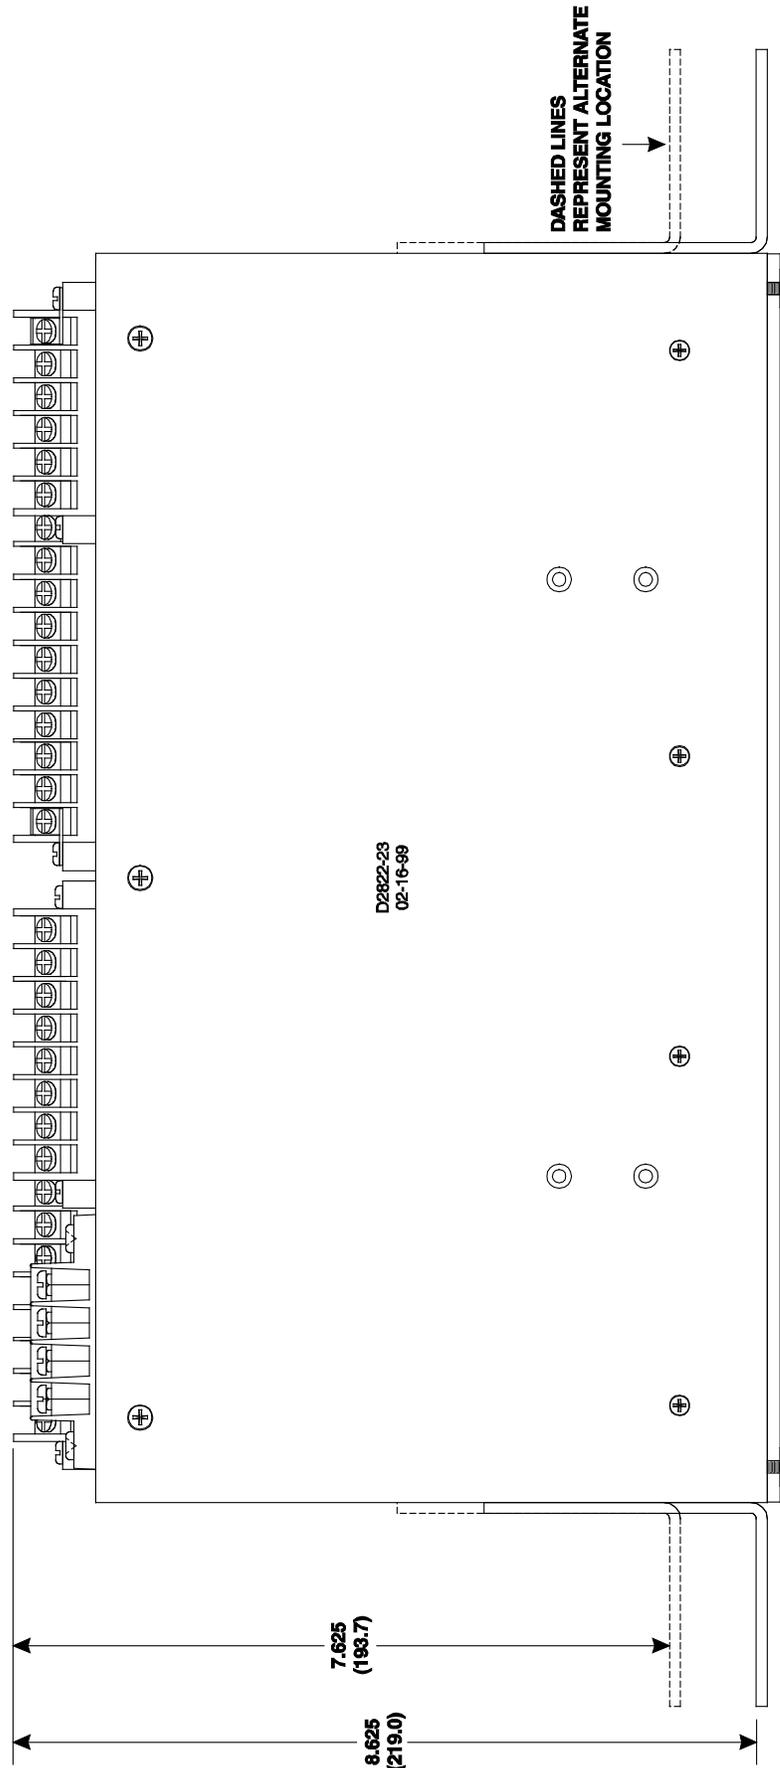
Rack Mount PSS-100 Outline Dimensions, Top View
